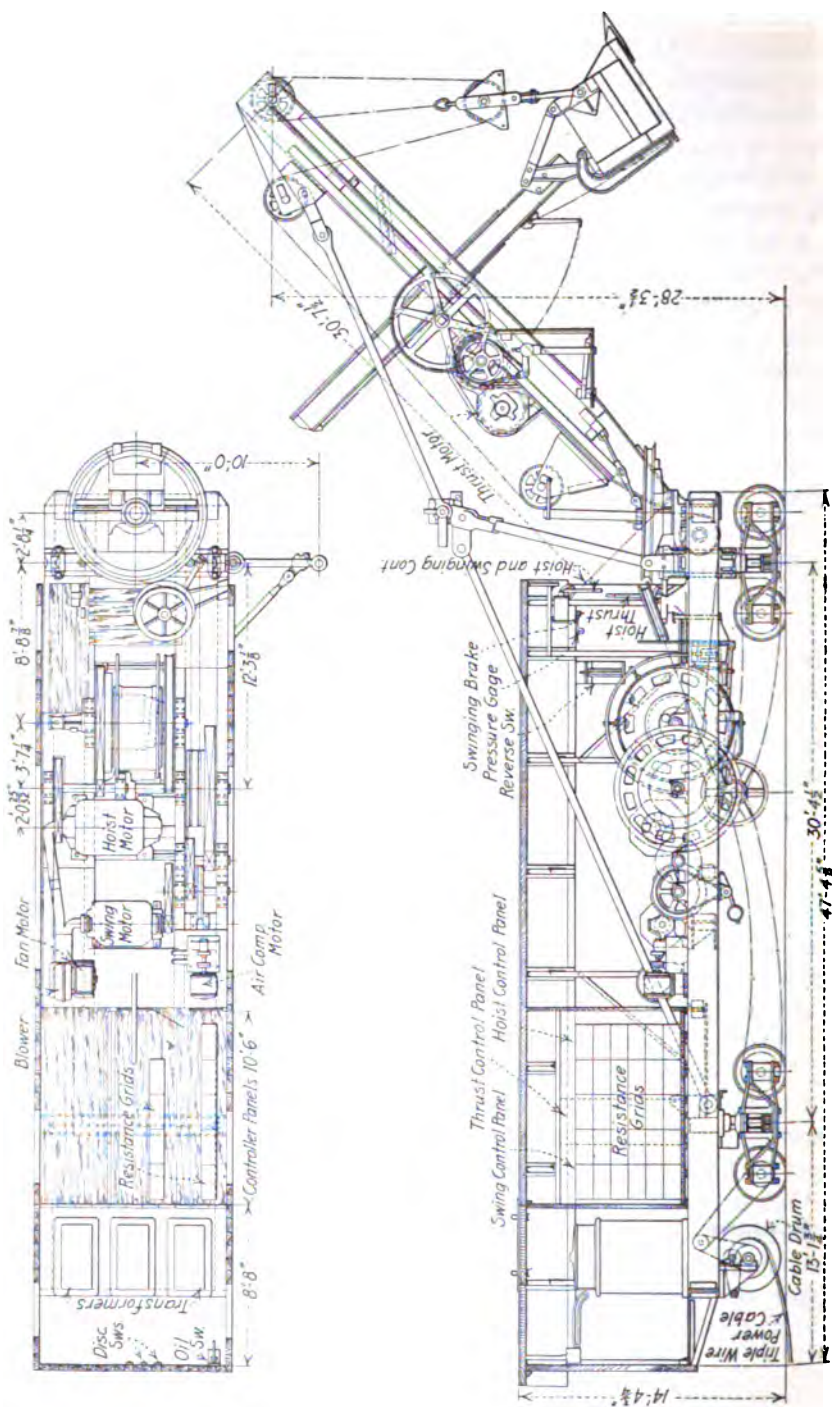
SHOVEL EQUIPPED WITH ALTERNATING-CURRENT MOTORS.
